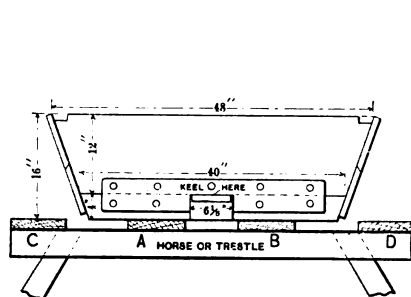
Mold Board.—Scale, $\frac{1}{4}$ Inch to the Foot.
